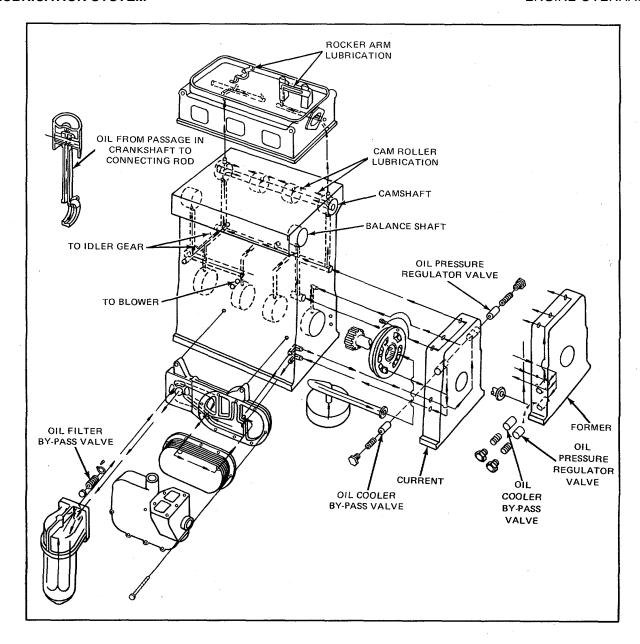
Schematic Diagram of Typical In-Line Engine Lubrication System
